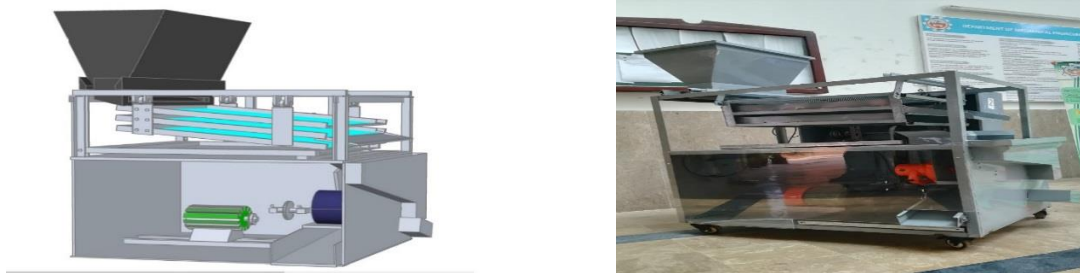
Cad and Fabricated Model of Grain Grading/Cleaning Machine.
